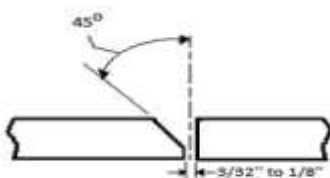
Joint Specifications for Piston Rod Welding.
